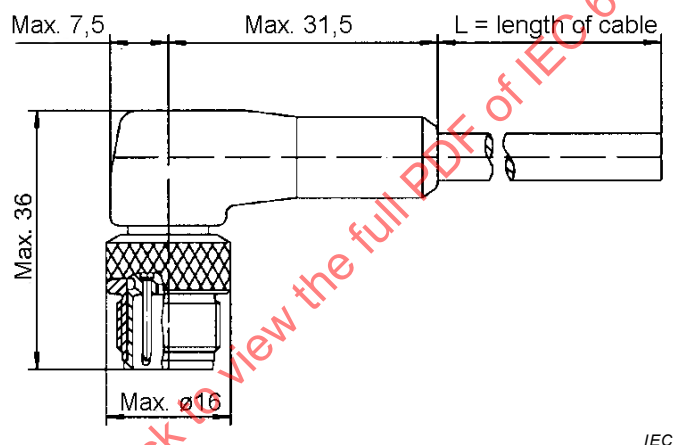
Non-rewireable connector, with male contacts, angled version, with locking nut
